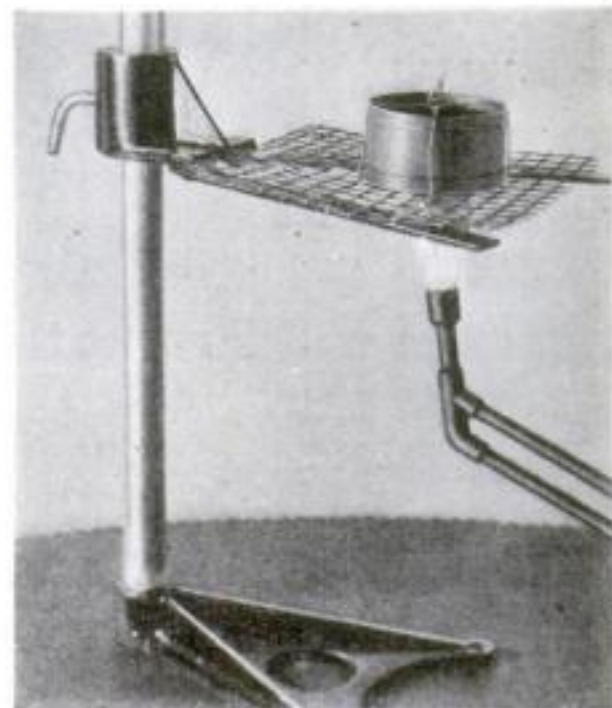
When soldering the bottom, bind the first joint also, so as to hold it together.
